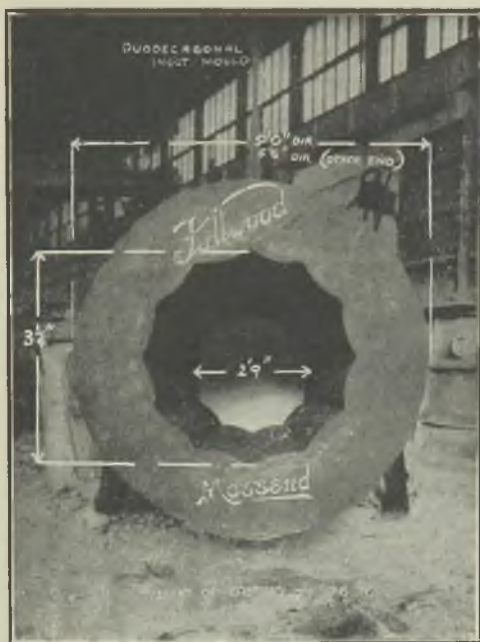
END VIEW OF A 26-TON CASTING, THE CORE FOR WHICH WAS SHOWN IN FIG. 5.
